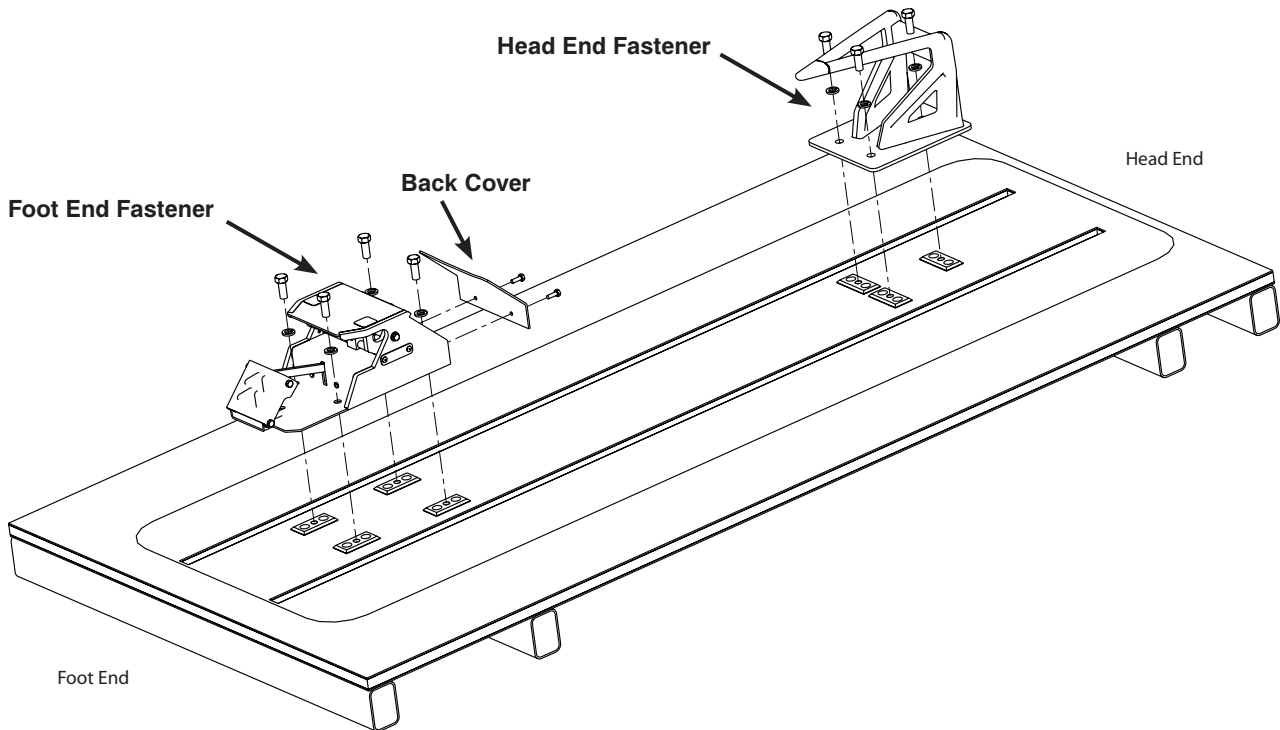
Head End and Foot End Fastener - Floor Plate Installation
